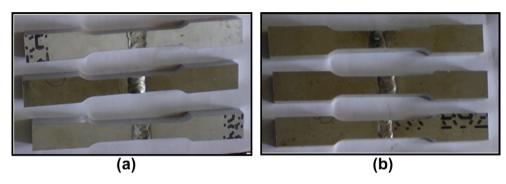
(a) As-welded tensile specimens; (b) treated tensile specimens.
